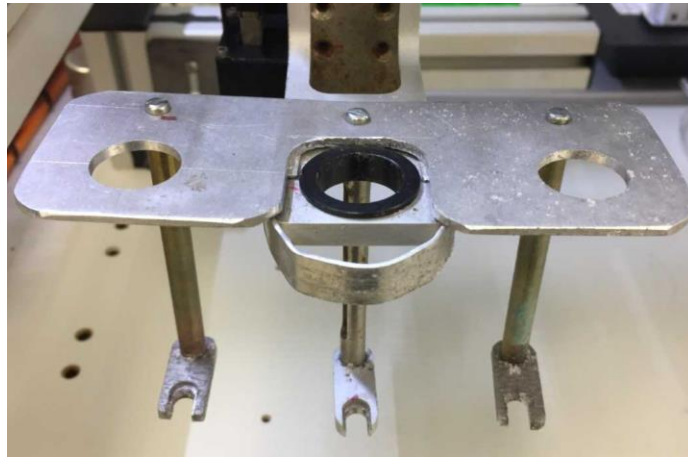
Attachment to hold three dispensing nozzles simultaneously.
